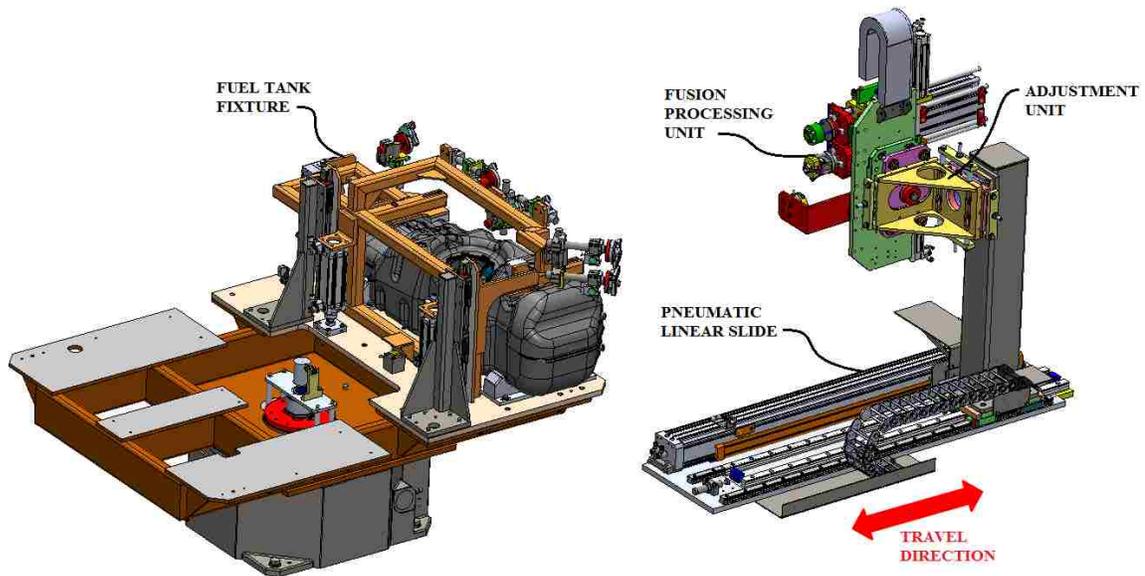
Fixed Mounted Fusion Unit Position Relative to the Fuel Tank Fixture
